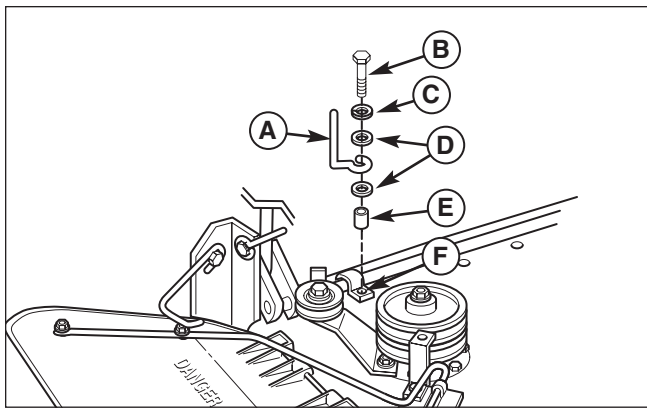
Install Wire Belt Guide 44" & 50" Mower Deck
